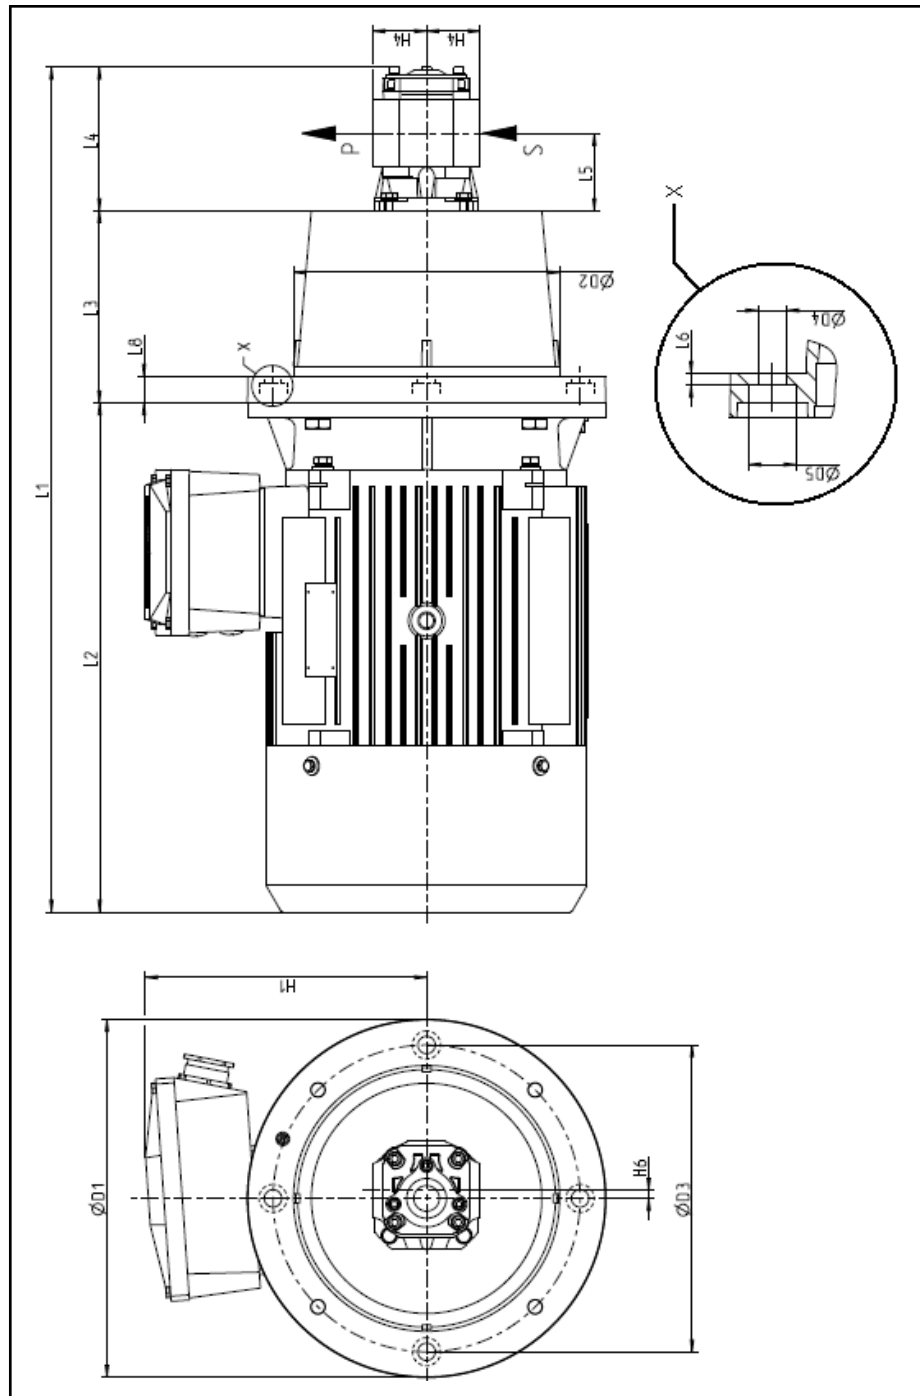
Dimension sheet "MPES2" with "PGF2" in the fastening mode "V"
